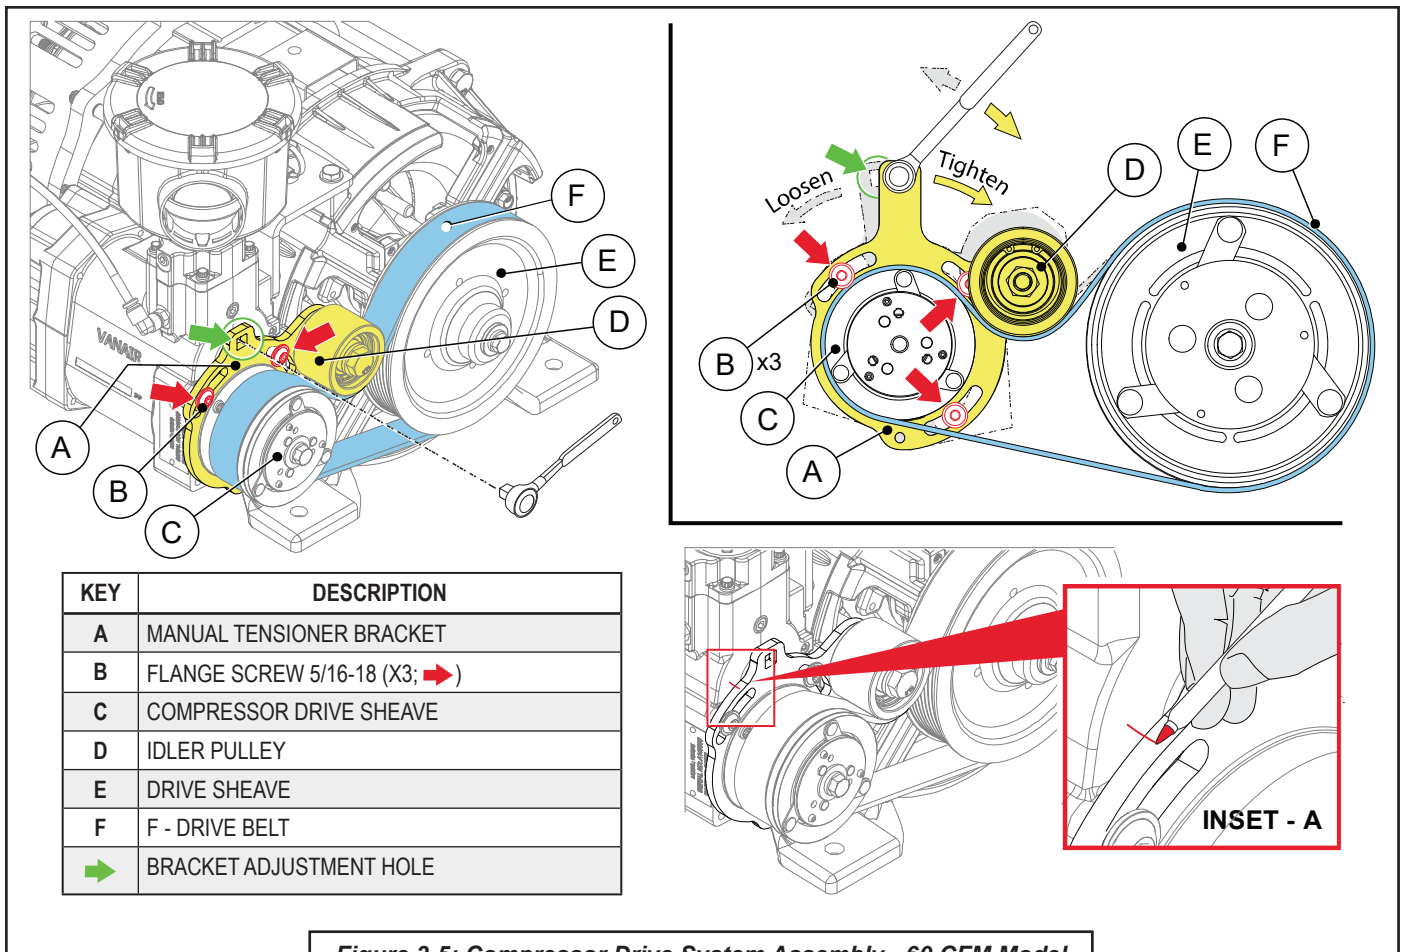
Compressor Drive System Assembly - 60 CFM Model
